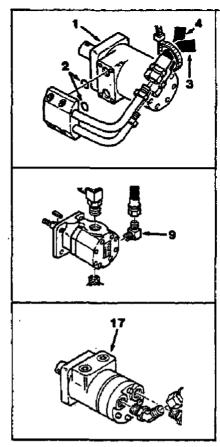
HYDRAULIC PUMP, FILTER, AND DRIVE MOTOR GROUP
